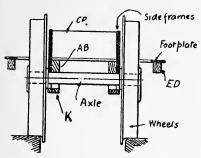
Section showing Details of Axleboxes, Frames, etc.
